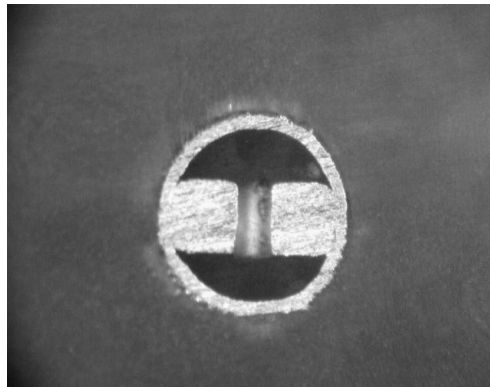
PCB Hole Deformation Radius-Cross-section parallel to board surface.
